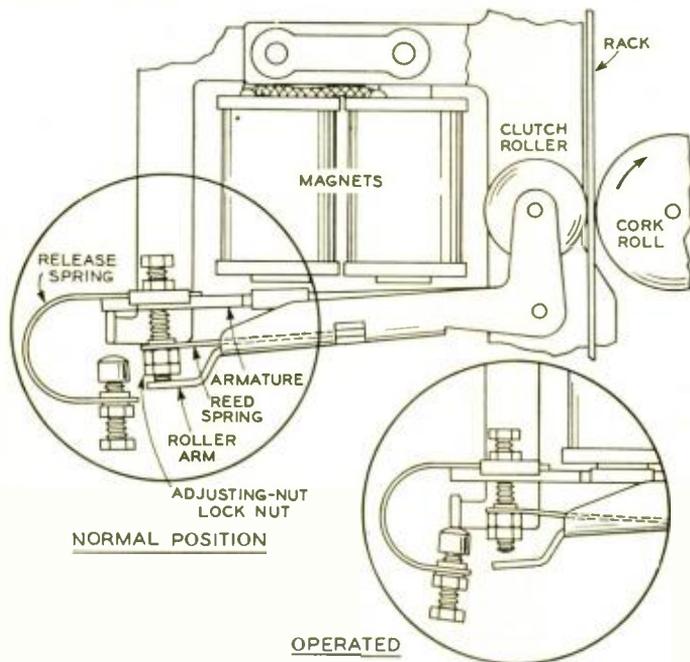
A clutch equipped with release spring to provide a releasing force regardless of the screw-gap opening
